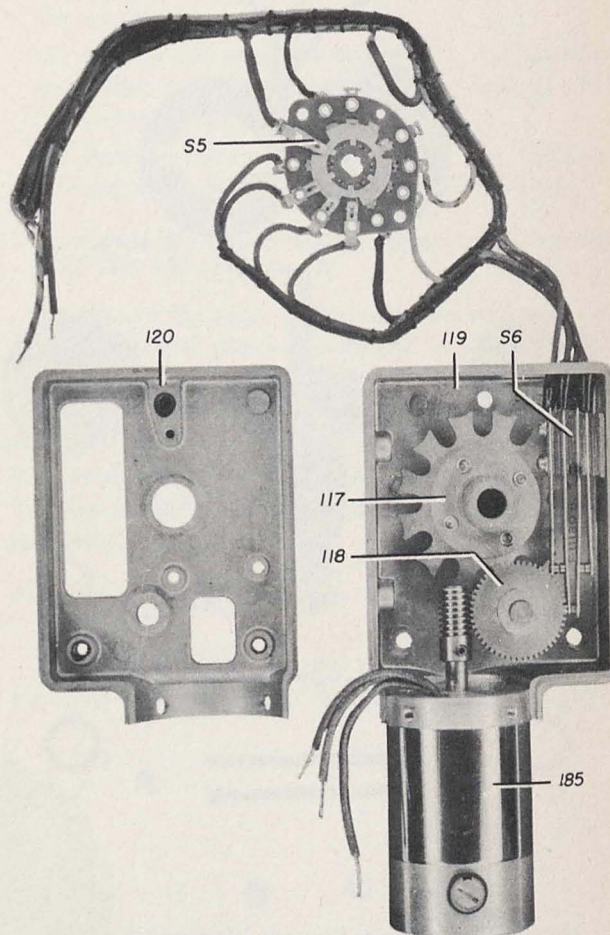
BAND SWITCH DRIVE ASSEMBLY, REF. No. 182; OPEN
